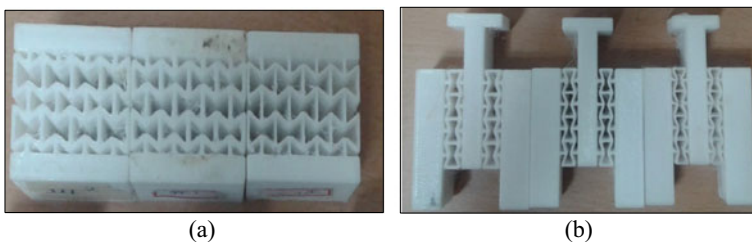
Fabricated a compressive test specimens b shear test specimens
